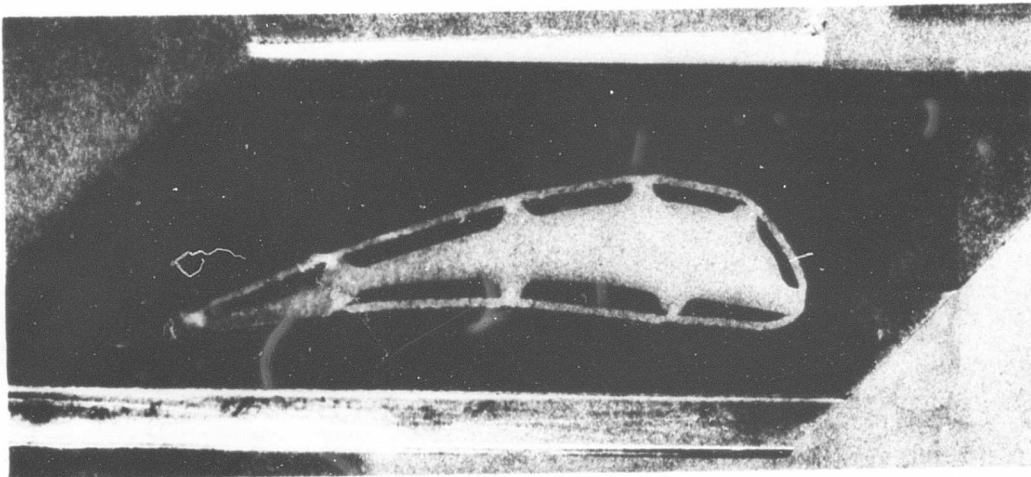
A Cross Section of a Fully Welded Blade.
